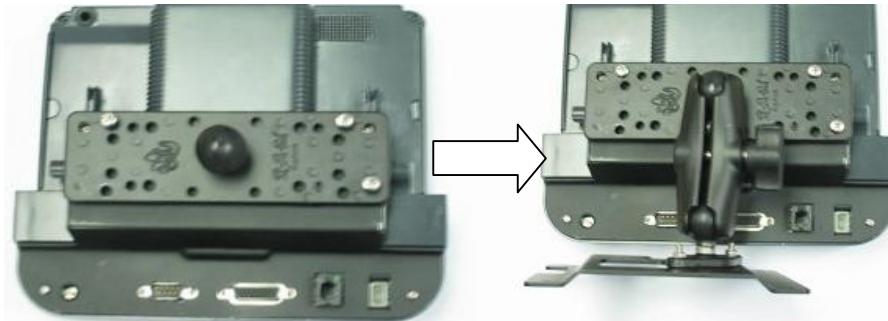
Screwing the Mounting Bracket onto the MT Rear
